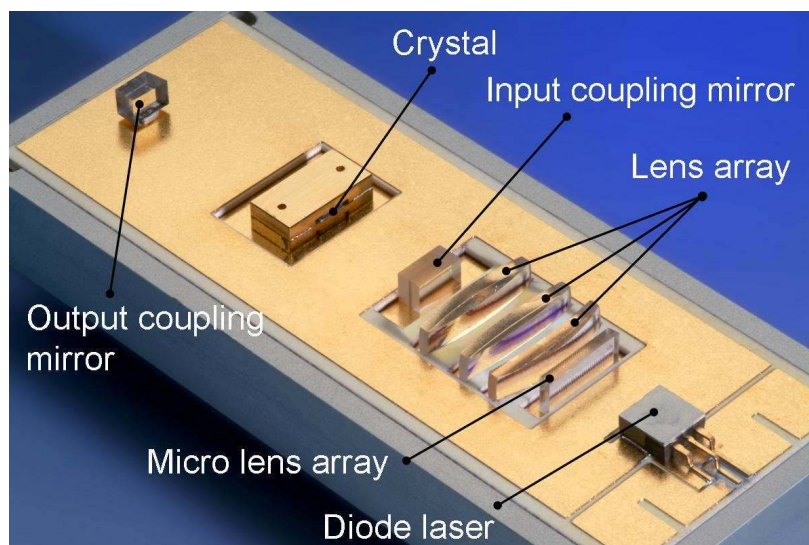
Demonstrator of the laser device designed for the automated assembly. Source: ILT.
